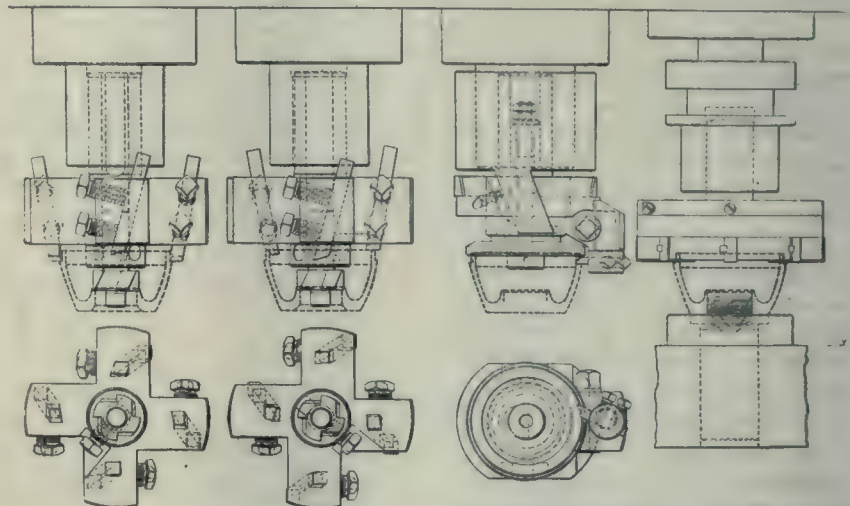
TOOL LAYOUT FOR MACHINING 4.7 SHRAPNEL HEAD — SECOND OPERATION.
